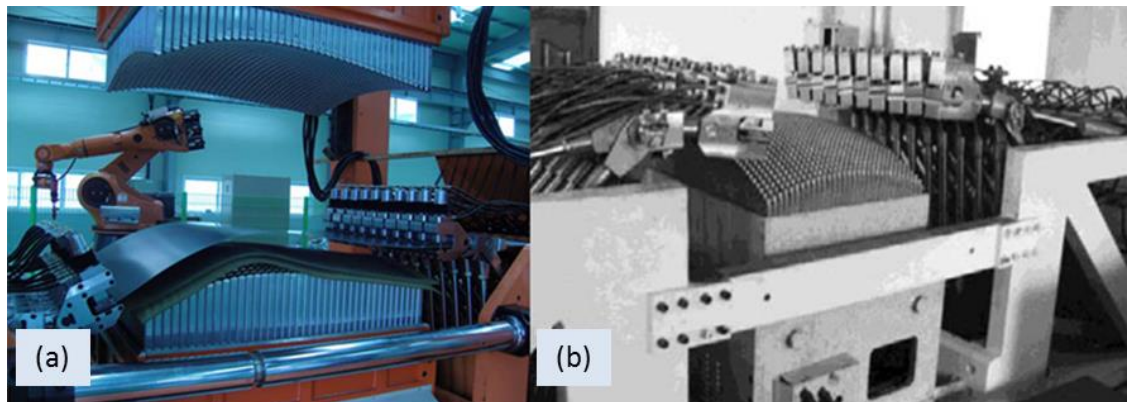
The machines developed at Yonsei University in Seoul (a) and Jilin University in China (b)
